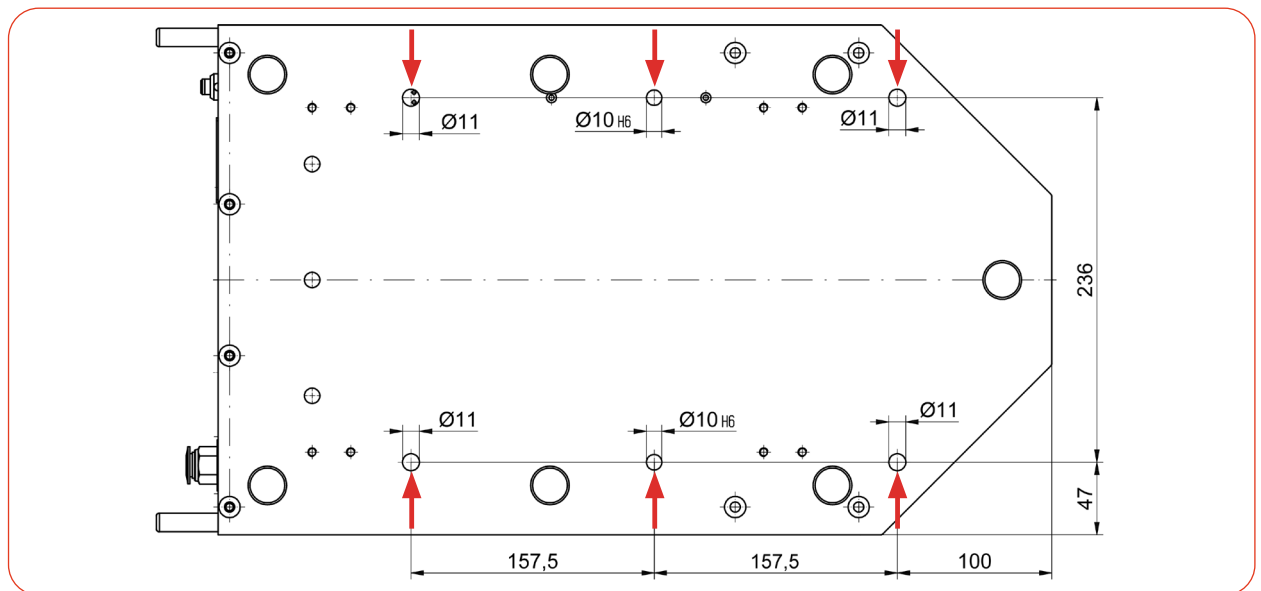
Slip fit bores and mounting holes on the PM 100 and PM HP75/150, bottom view
